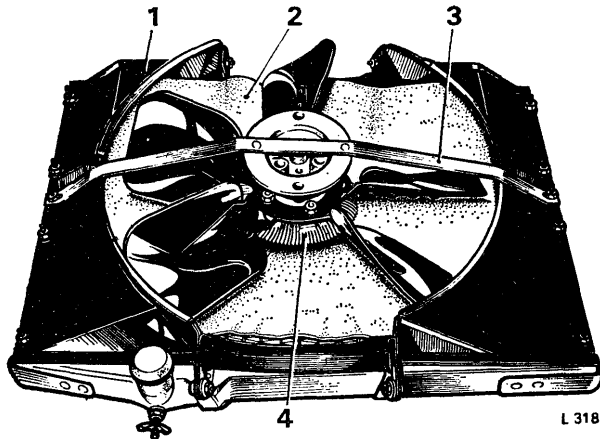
METHOD OF RETAINING FAN ASSEMBLY FOR RADIATOR/ENGINE REMOVAL
